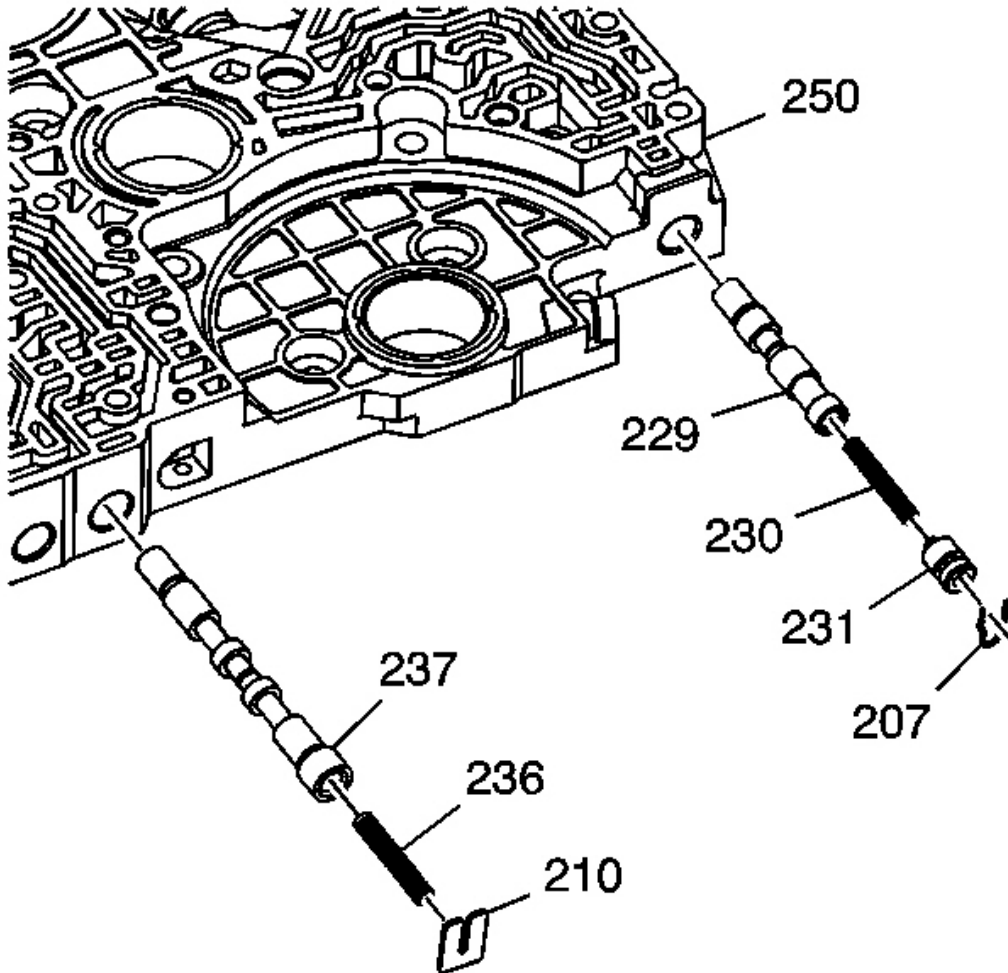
Main Control Valve Body, Spring Retainer, Shift Valve D, Retainer Clip & Bore Plug
